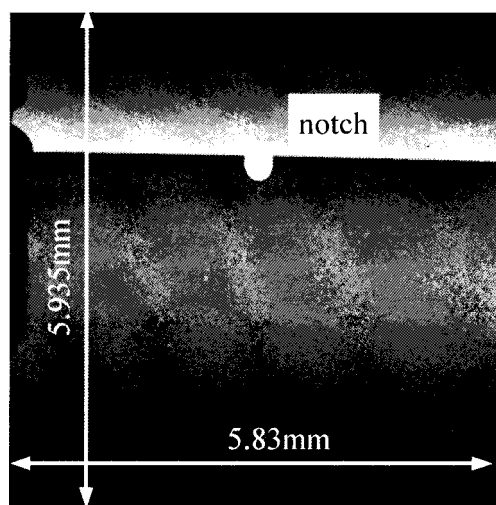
Imaging of the crack in the specimen without loading of crack opening.
